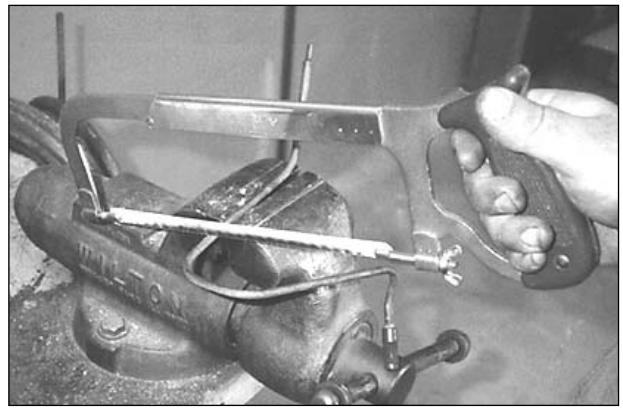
Cut heat riser tube as shown. Use with 1/4" vacuum hose.
